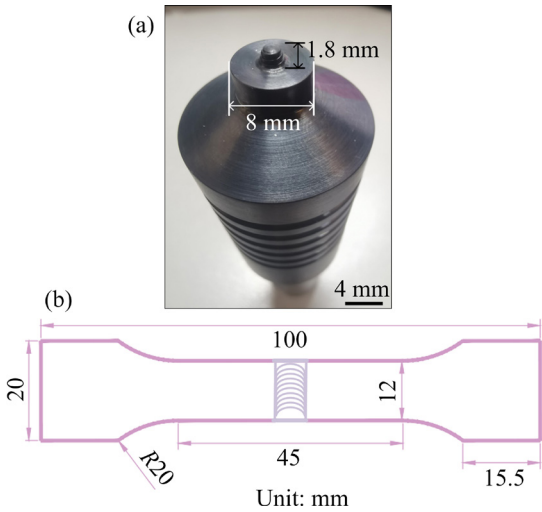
Appearance of welding tool (a) and dimensions of tensile sample (b)
